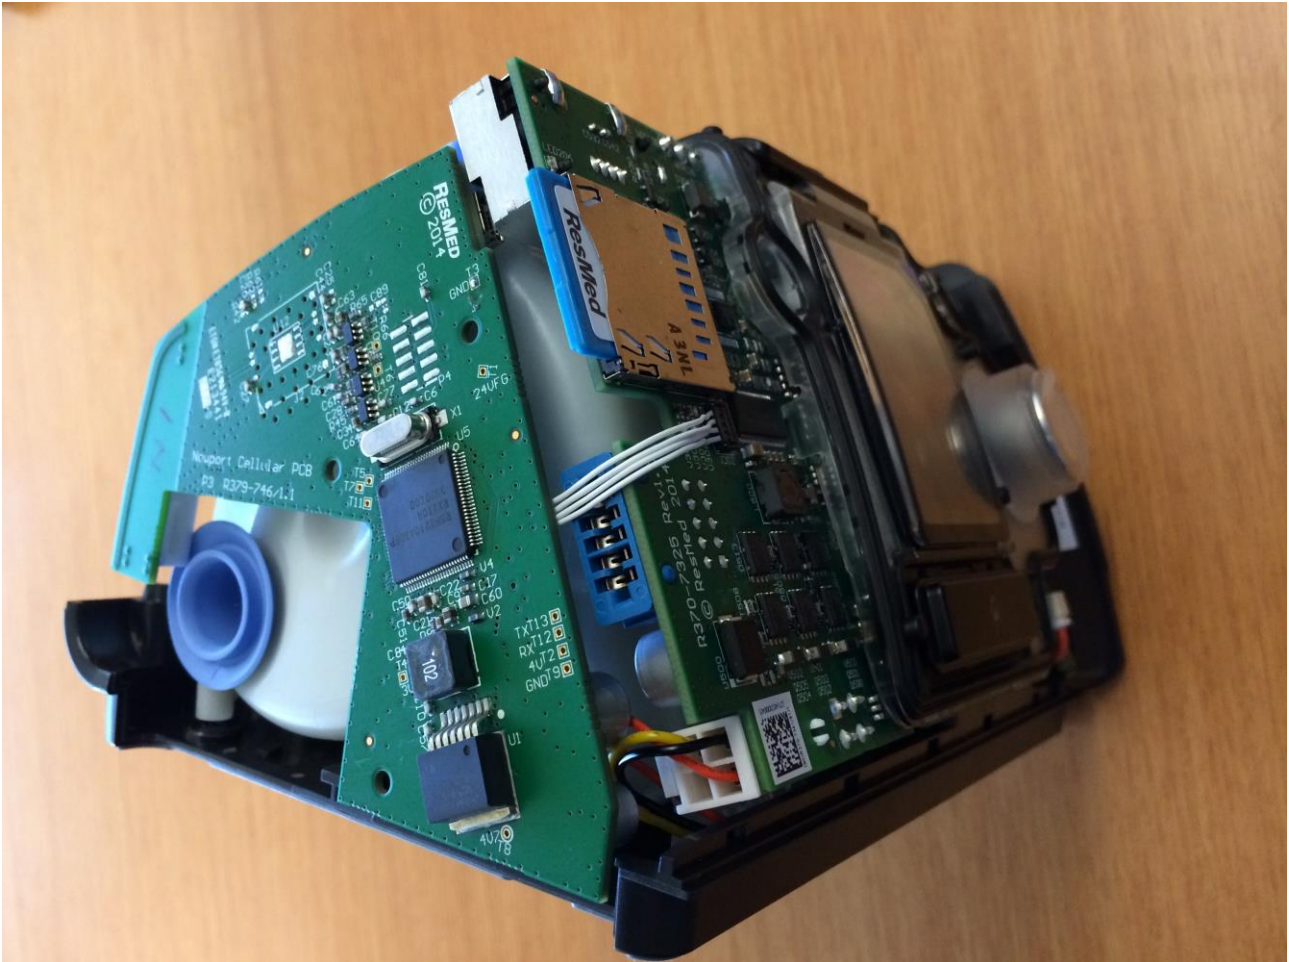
CPAP with covers removed, showing CAM PCBA. Note that CAM PCBA is affixed to end over in assembled unit.
